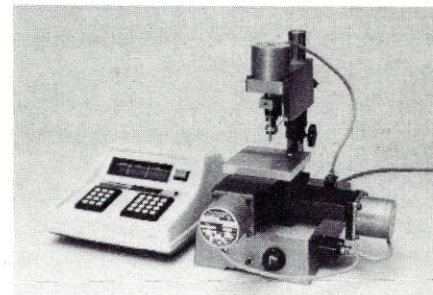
Minitool Model 2500 CNC numerically-controlled micro drilling machine.
